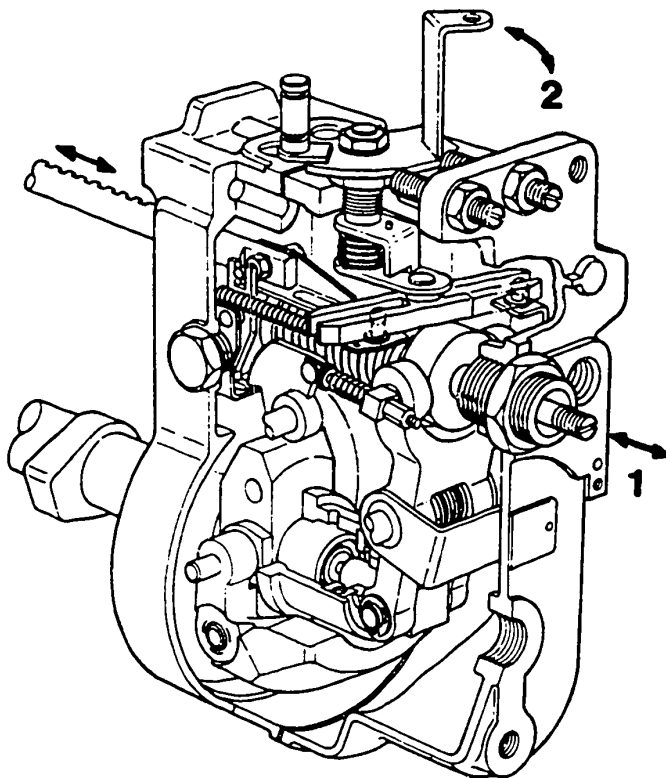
Checking and confirming slip resistance of governor shaft and control rod
